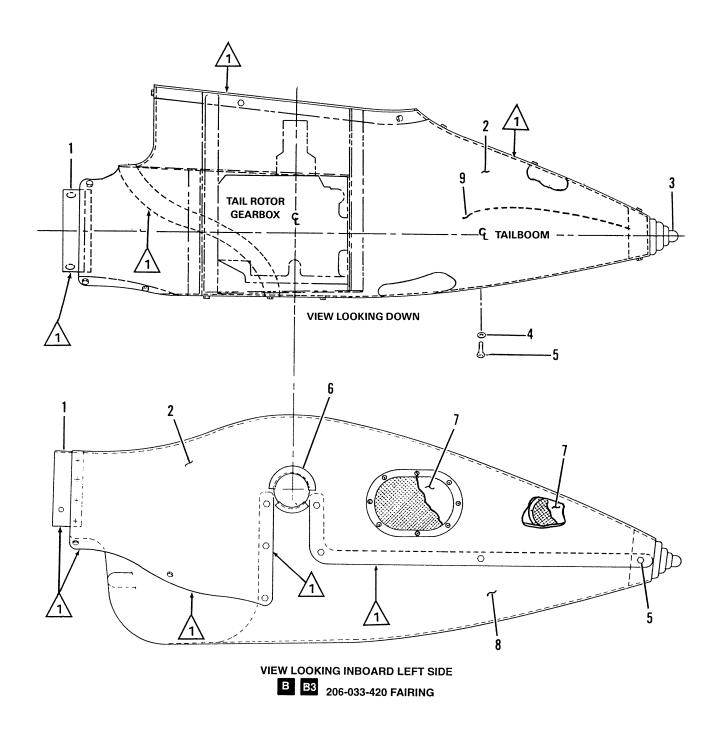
Tail Rotor Gearbox Fairing (S/N 4 through 1251)
